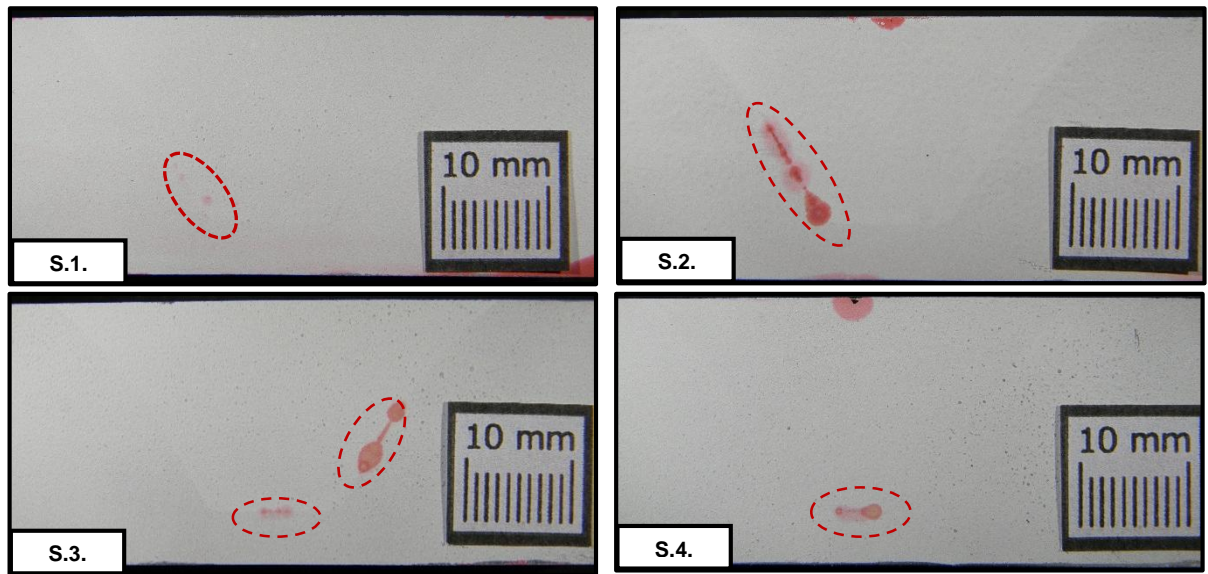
Dye Penetrant Testing of Welds S.1 to S.4
